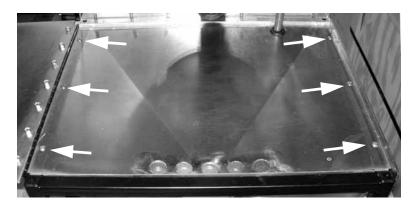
To remove the base plate, take out the 6 button head cap screws (indicated by arrows) along the sides, then lift the base plate to access the coolant reservoir. Detach the coolant nozzle if necessary.
